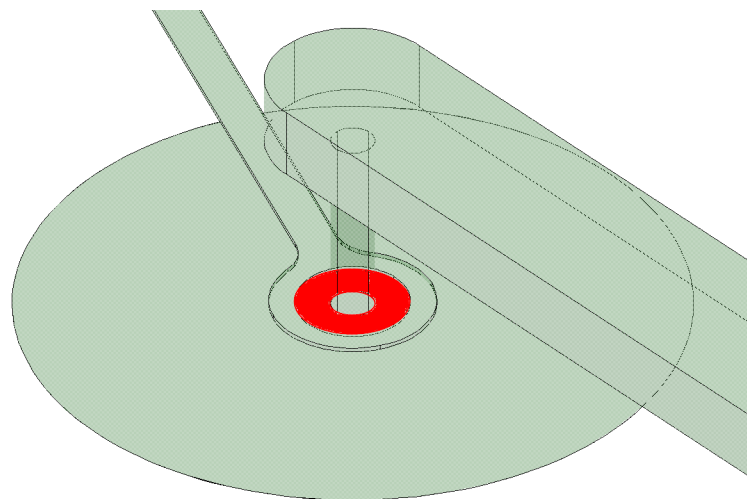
Enlarged view of a valve, with the valve seat highlighted in red.
